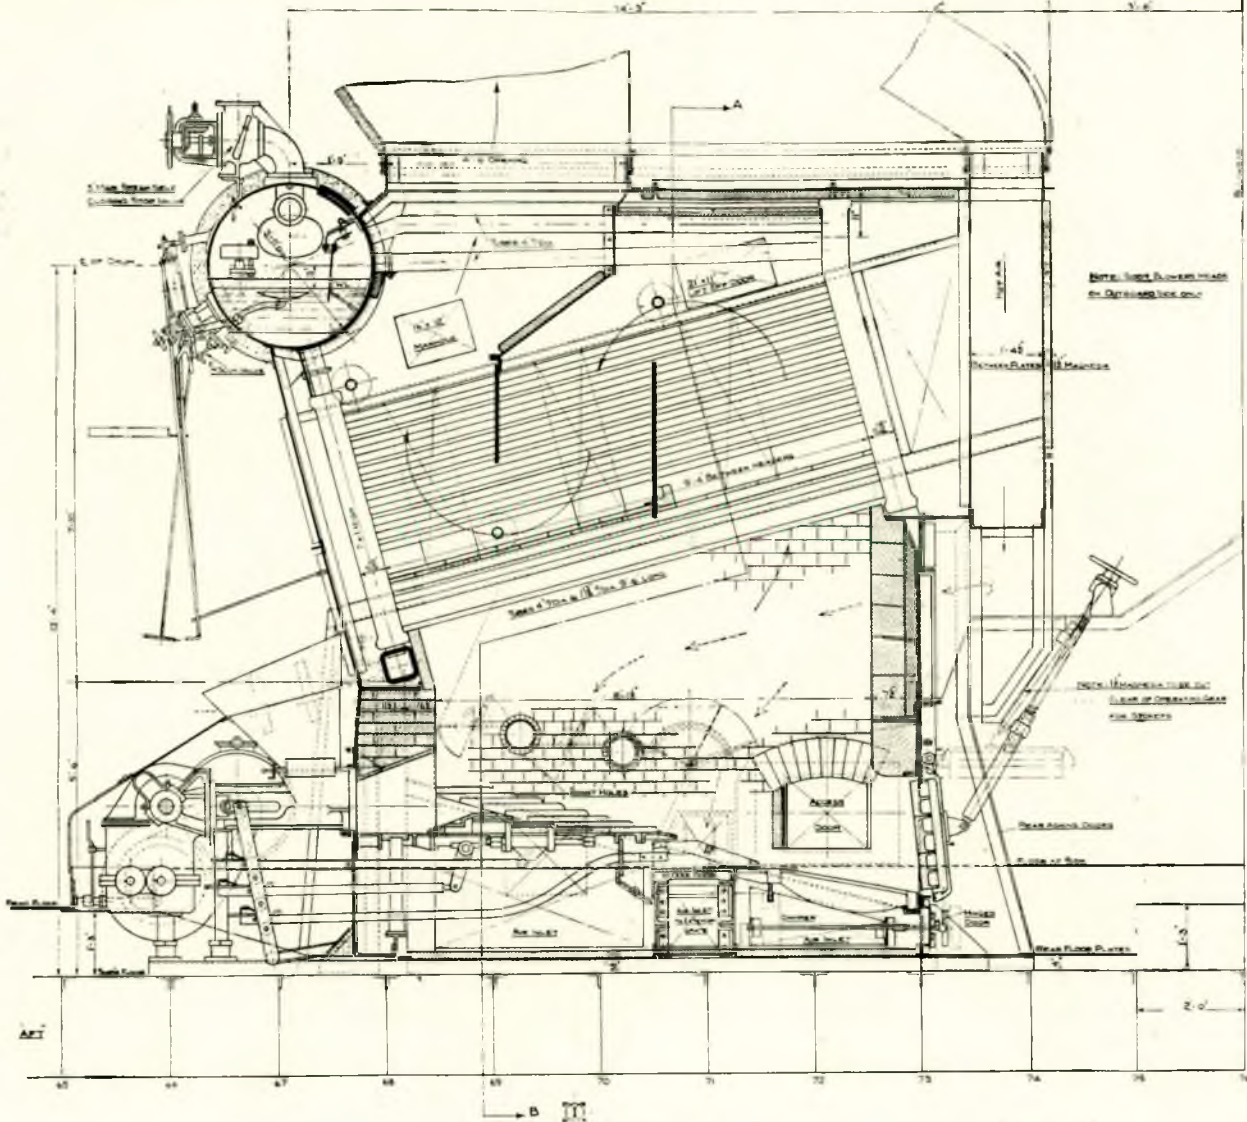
Side section of one boiler and stoker in "Great Western".
